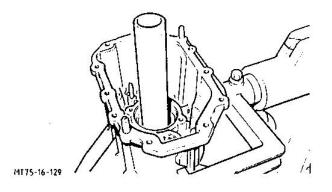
Drive out double-lipped radial oil seal with suitable length of tube.
